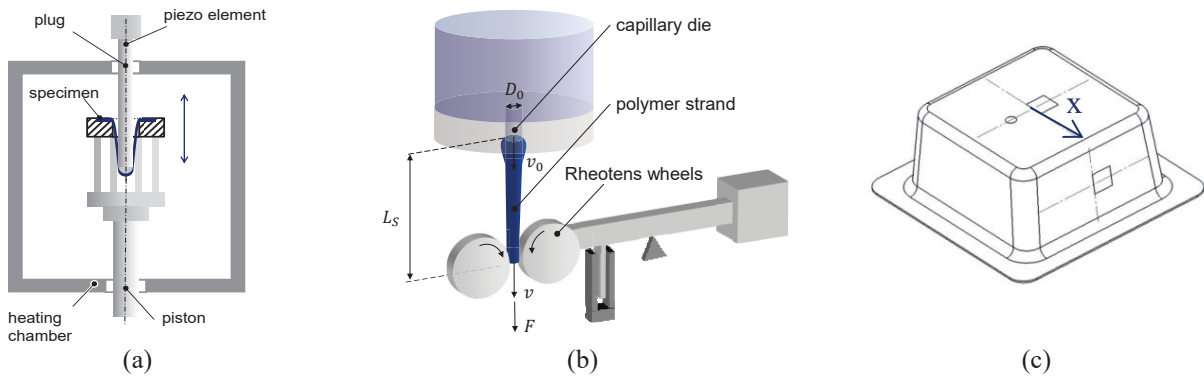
IKT TMC-test (a), Rheotens-test (b), Thermoforming mold
